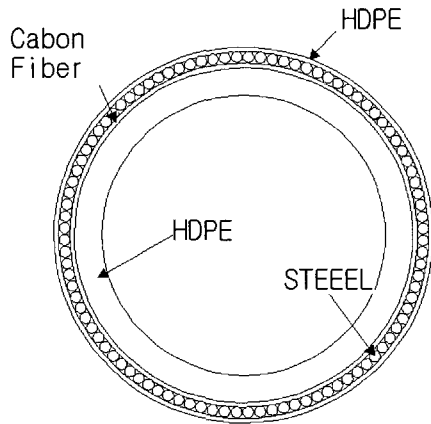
Cross-section of steel-reinforced HDPE pipe
